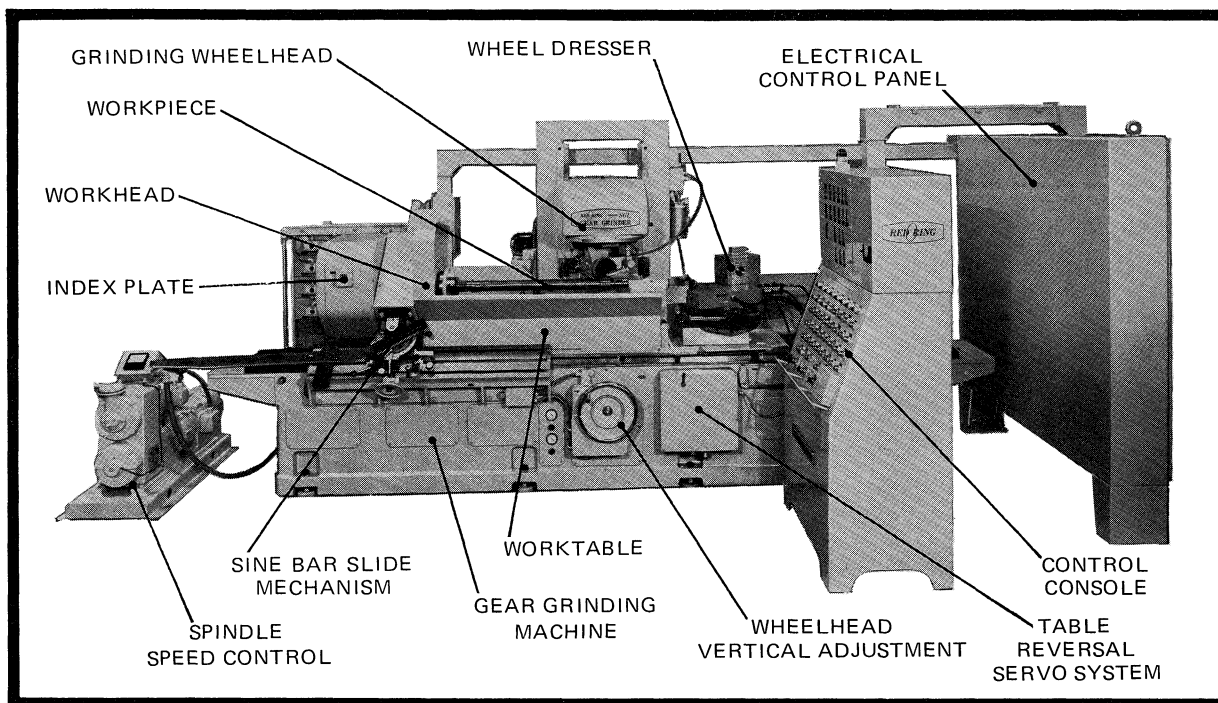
A gear form-grinding center with major operating components indicated.
